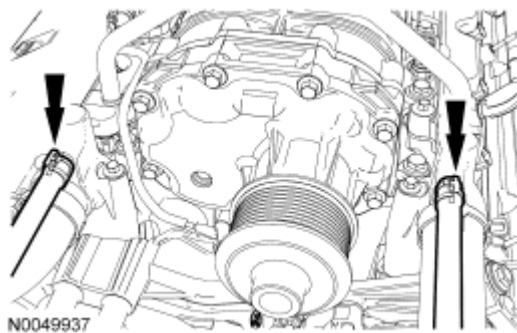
Locating Coolant Vent Hoses From The Intake Manifold
